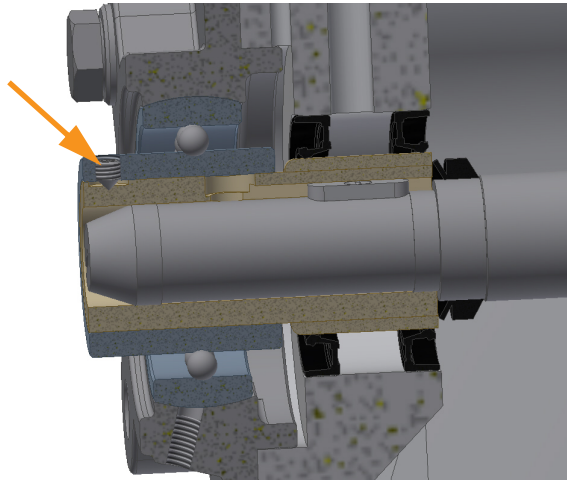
Fixing the position of the bushing (similar to illustration)
